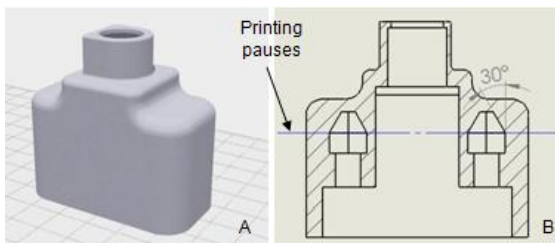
Housing (concept 12): A) print orientation; B) cross section
